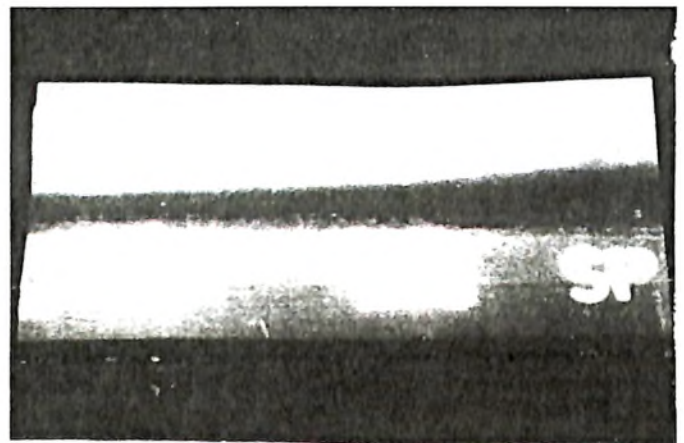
X-Ray Photograph 14 mm thick butt weld with rotary motion of arc (Conventional MIG) Free from pores.
